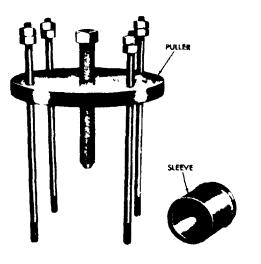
C-8. Puller and Sleeve for Converter Pump Bearing
